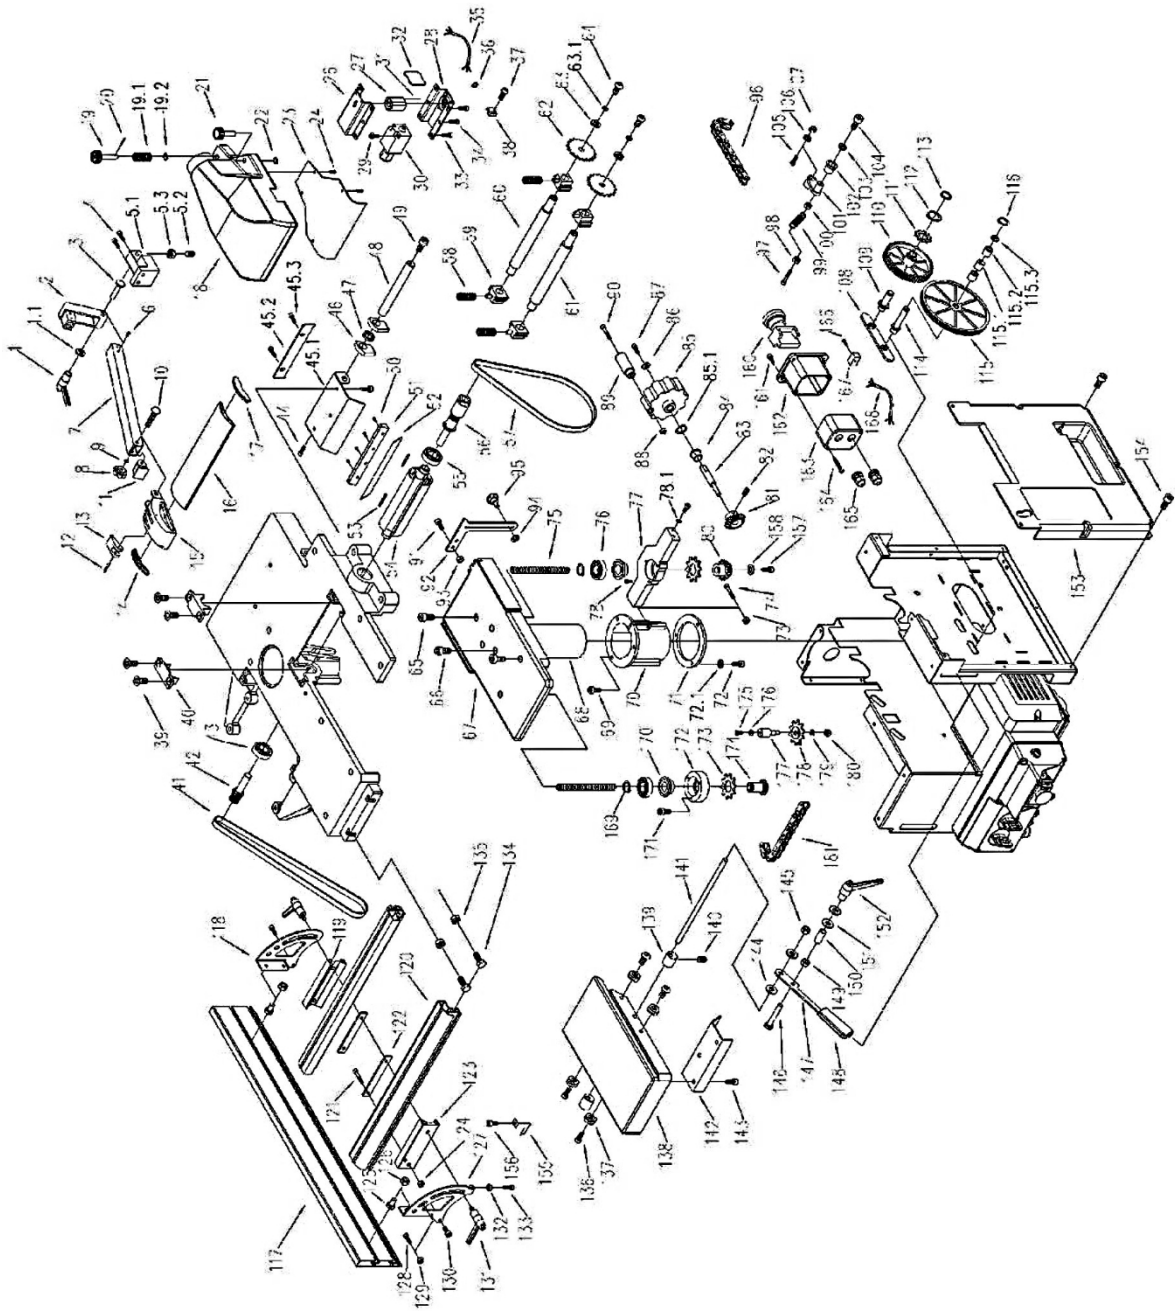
Spare parts drawing 3 Universal multiple combination machine UMK 6
